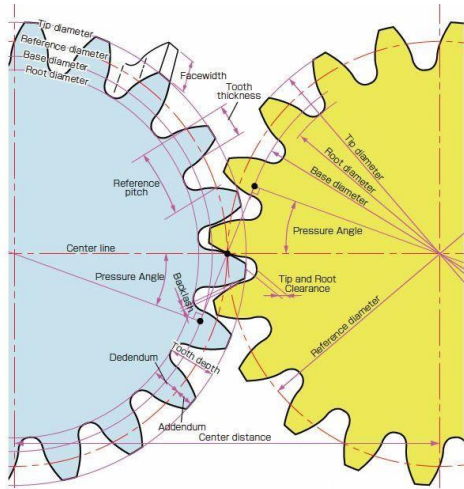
Gear diameters and main geometry (KHK Stock gears, 2022)
